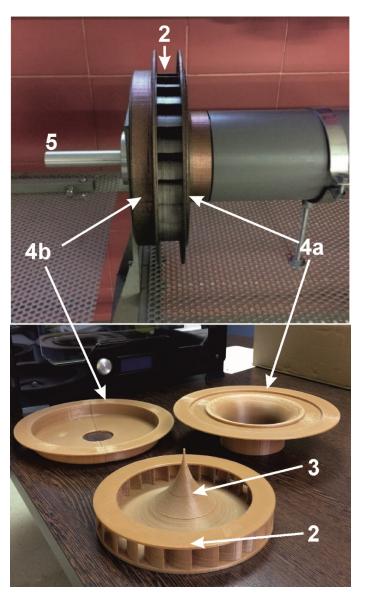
Top: Turbine assembled. Bottom: components built with the 3D printer. Labels in Figure 7.
